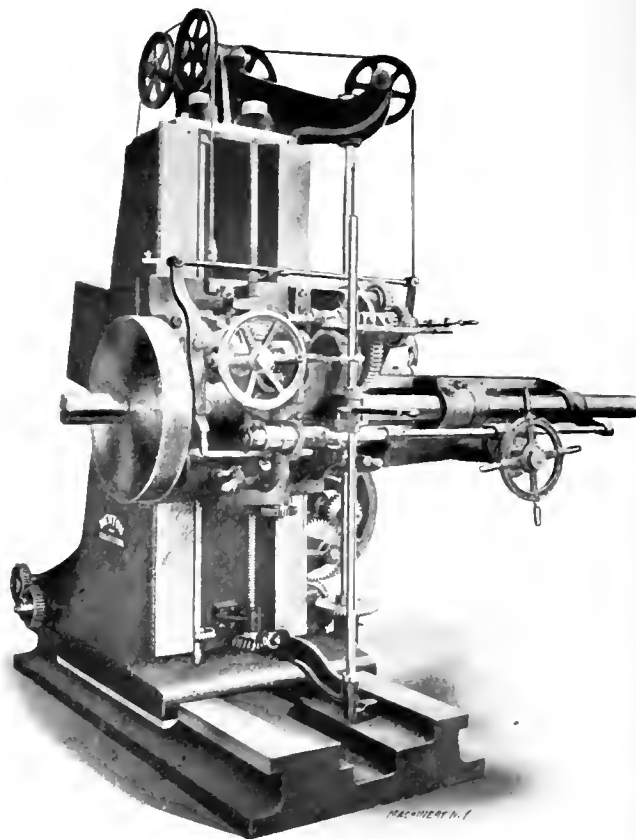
Newton Horizontal Boring, Drilling and Milling Machine.
